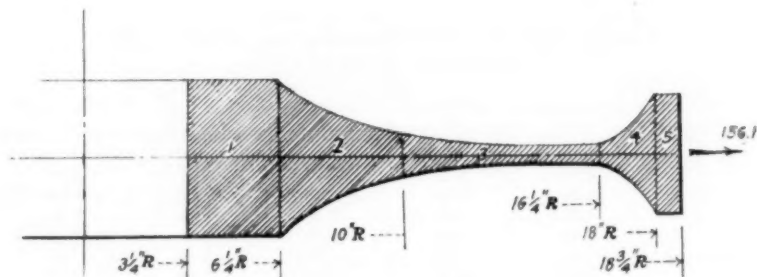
HALF-SECTION OF DISK WHEEL DESIGNED TO RUN 3600 R.P.M.
